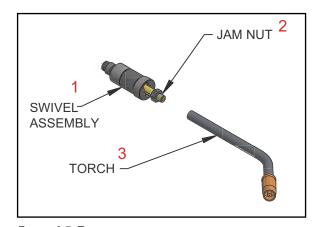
TORCH AND SWIVEL ASSEMBLY
